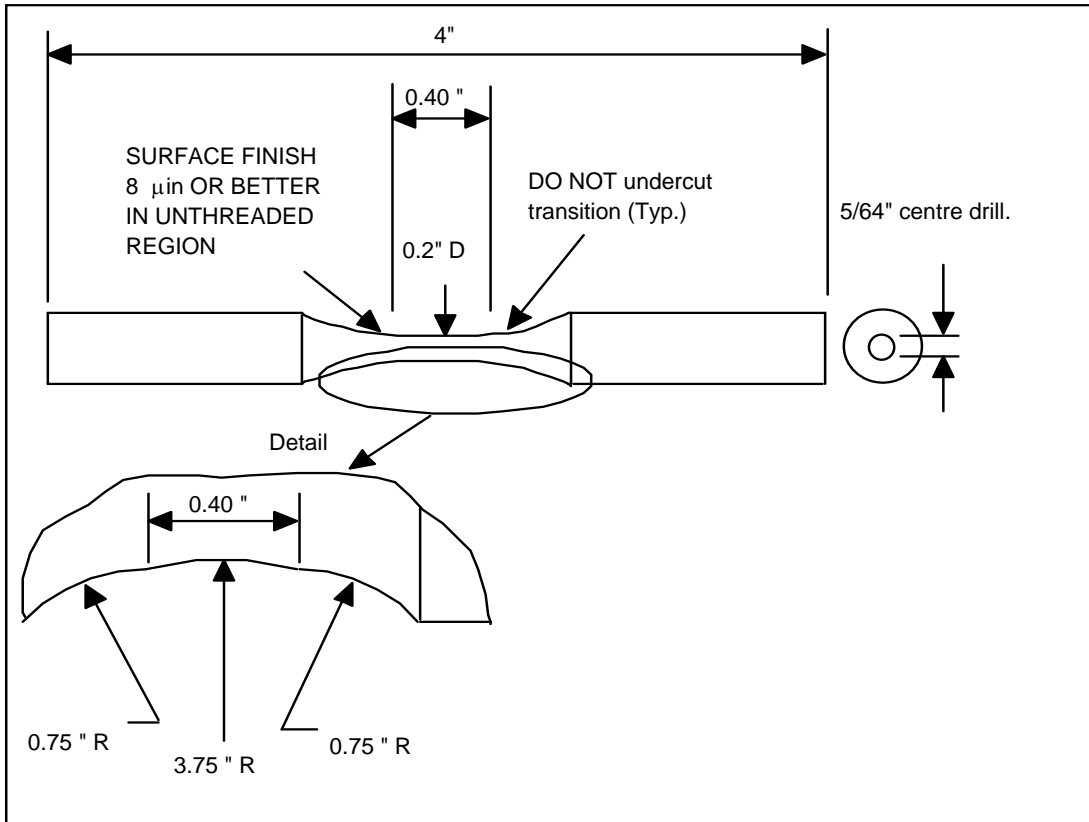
Uni-axial smooth cylindrical fatigue specimen
